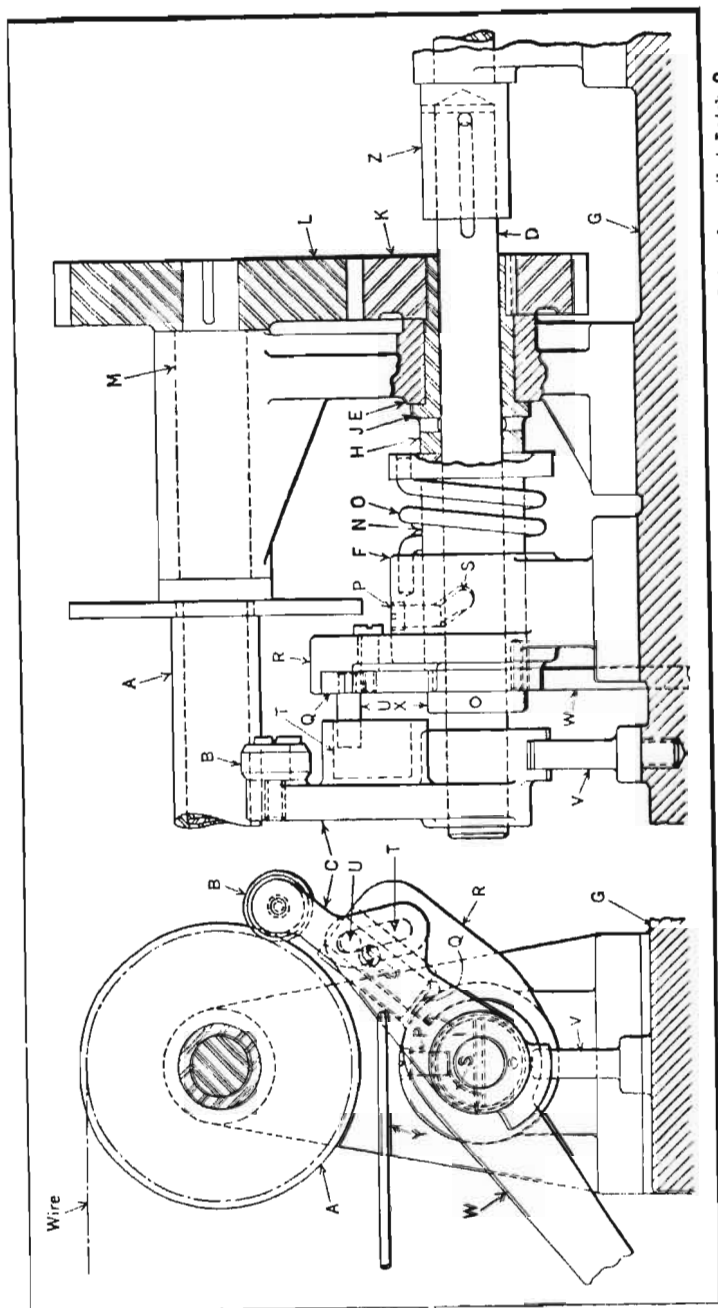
Reel A of this Mechanism is Stopped Automatically when Filled with Wire which Forces Roller B Outward, so that Latch Q Releases Sleeve N, Permitting Torsion Spring O to Revolve Sleeve N. This Causes the Pin P in the Helical Slot S to Slide the Clutch Member H out of Mesh with the Clutch Sleeve J, thus Disconnecting the Drive from Shaft D to Reel A through the Gears K and L.
